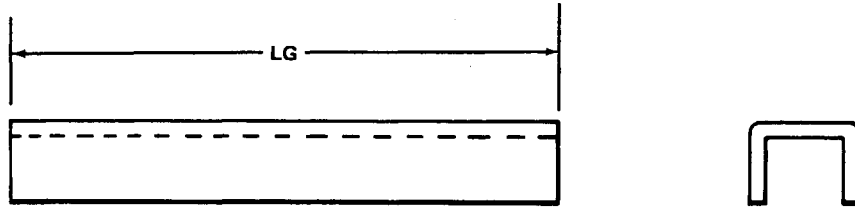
Part Number 205-060-862-1, BRACKET ASSEMBLY
